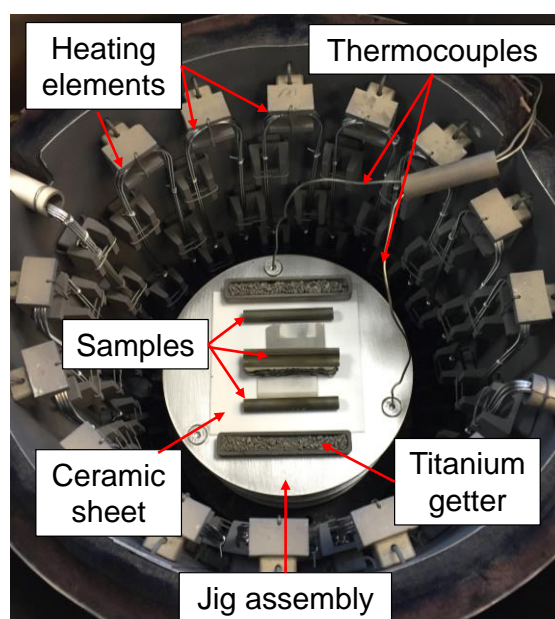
Internal chamber of vacuum furnace used to perform heat treatments.
